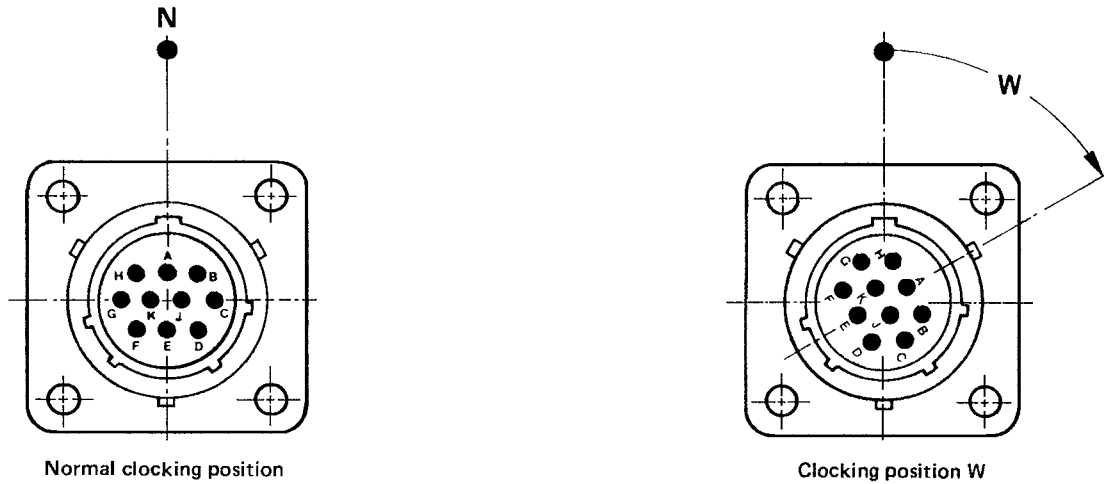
(b) - PHYSICAL DIMENSIONS
